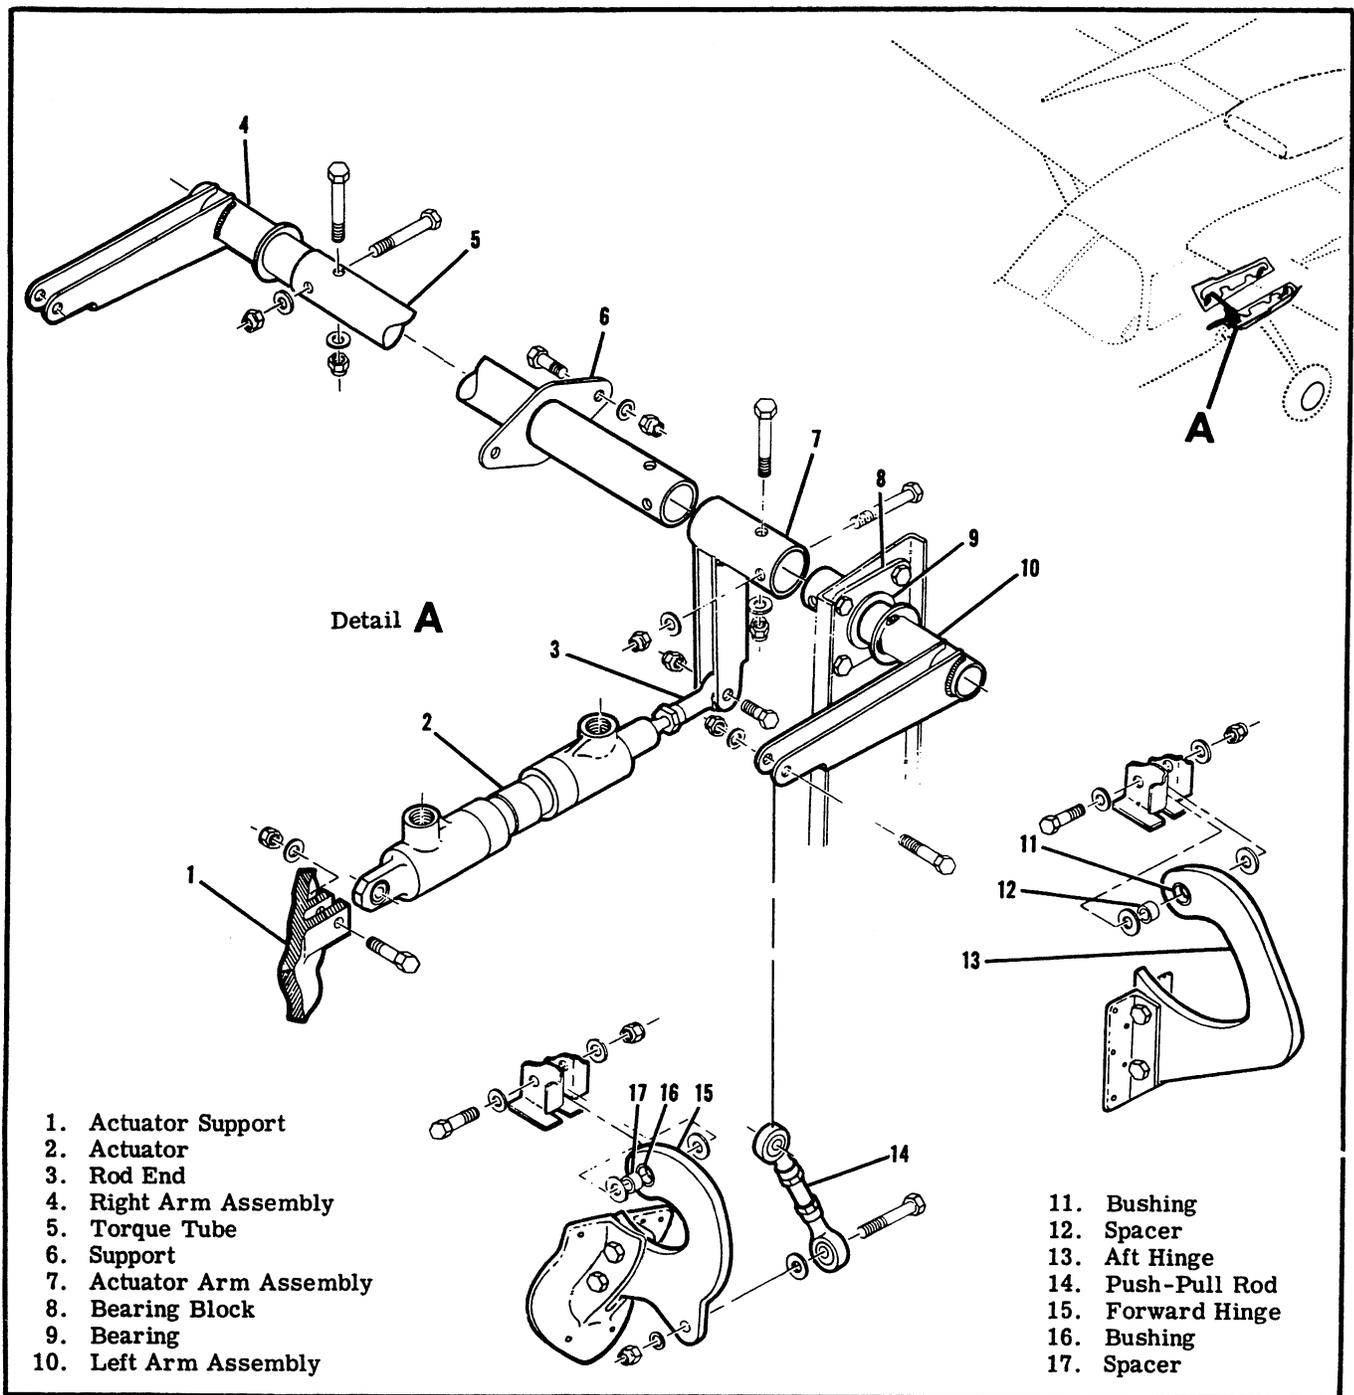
Main Gear Doors Installation (Sheet 1 of 2)
